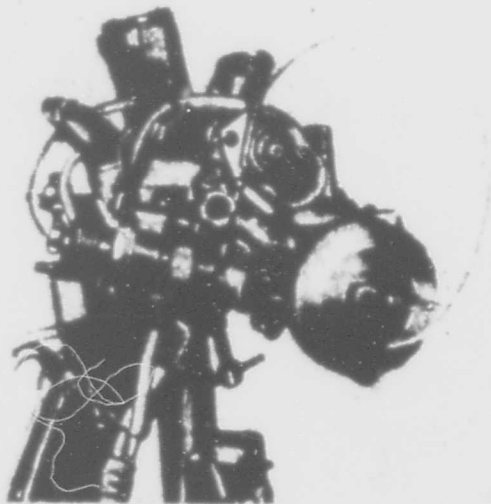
Working zone of automatic machine for welding pipe joints.
